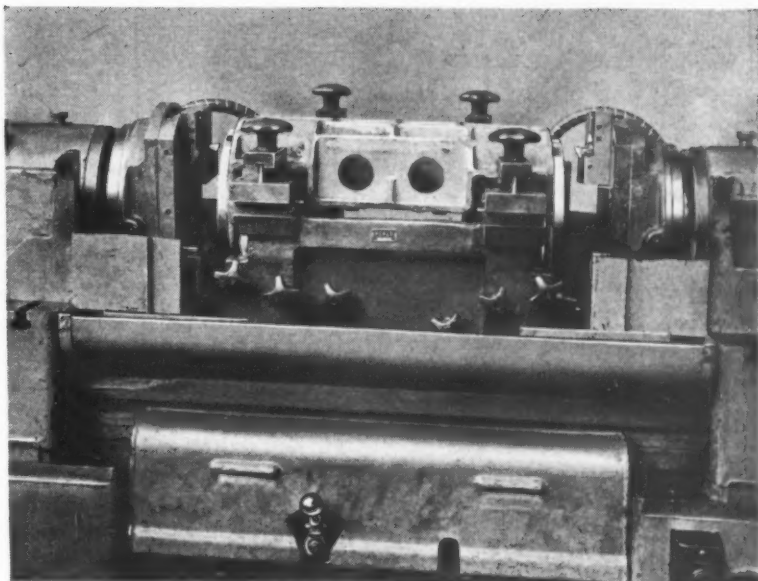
(Top) Machine Provided with Opposed Boring Heads, Each Equipped with Hydraulic Tool-slides
